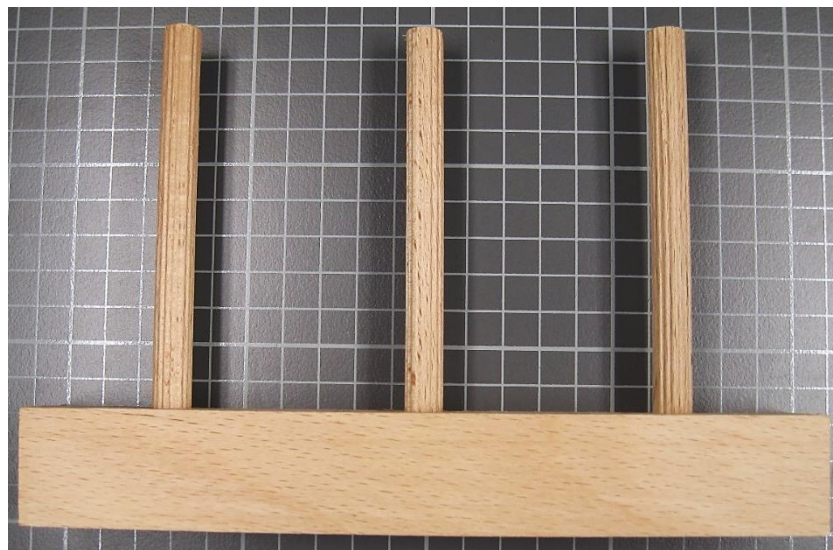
Picture of the real specimen (dowels welded into the base) prepared for testing
